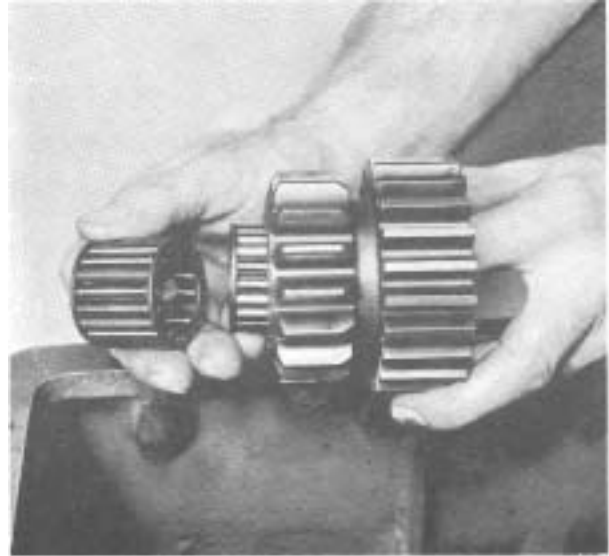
Insert two reverse idler gear bearings in idler gear.
